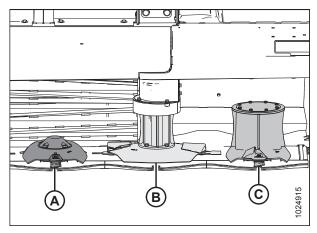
Cutterbar Disc Assemblies (R116 PT Shown, R113 SP Similar)
